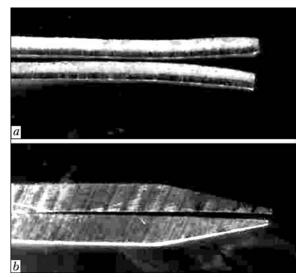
Appearances of specimens after mechanical tensile tests: a - traditional specimens; b - beveled specimens
